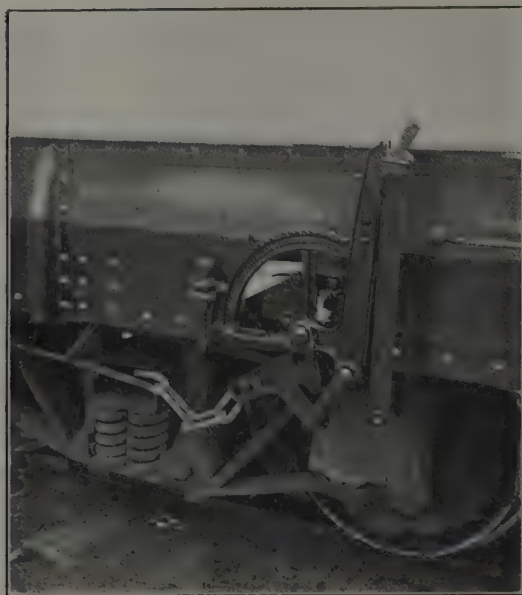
Ideal Safety Hand Brake, Staff Type. W. H. Miner.
